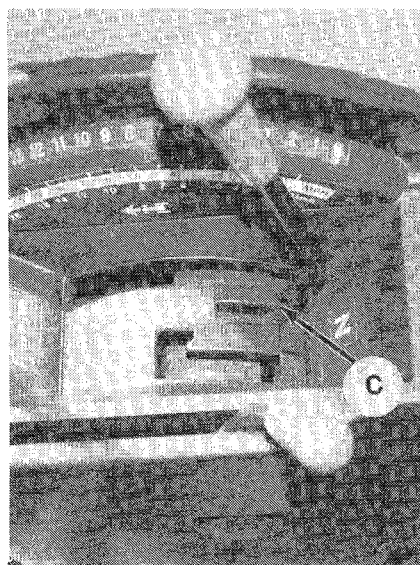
Clearance (C) between front of selector lever and edge of guide plate should be 0.1 inch (2 mm). Refer to text.
